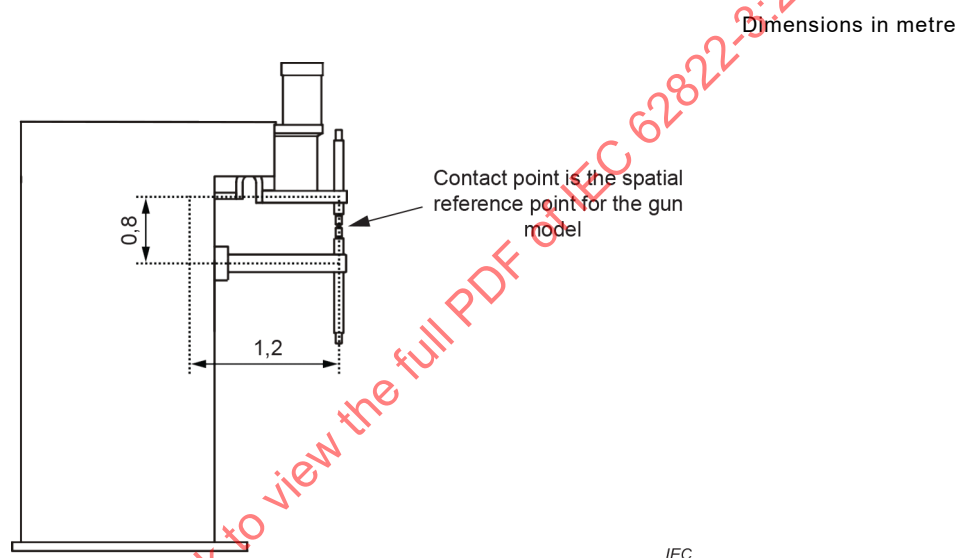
Geometry of the stationary spot welding gun
